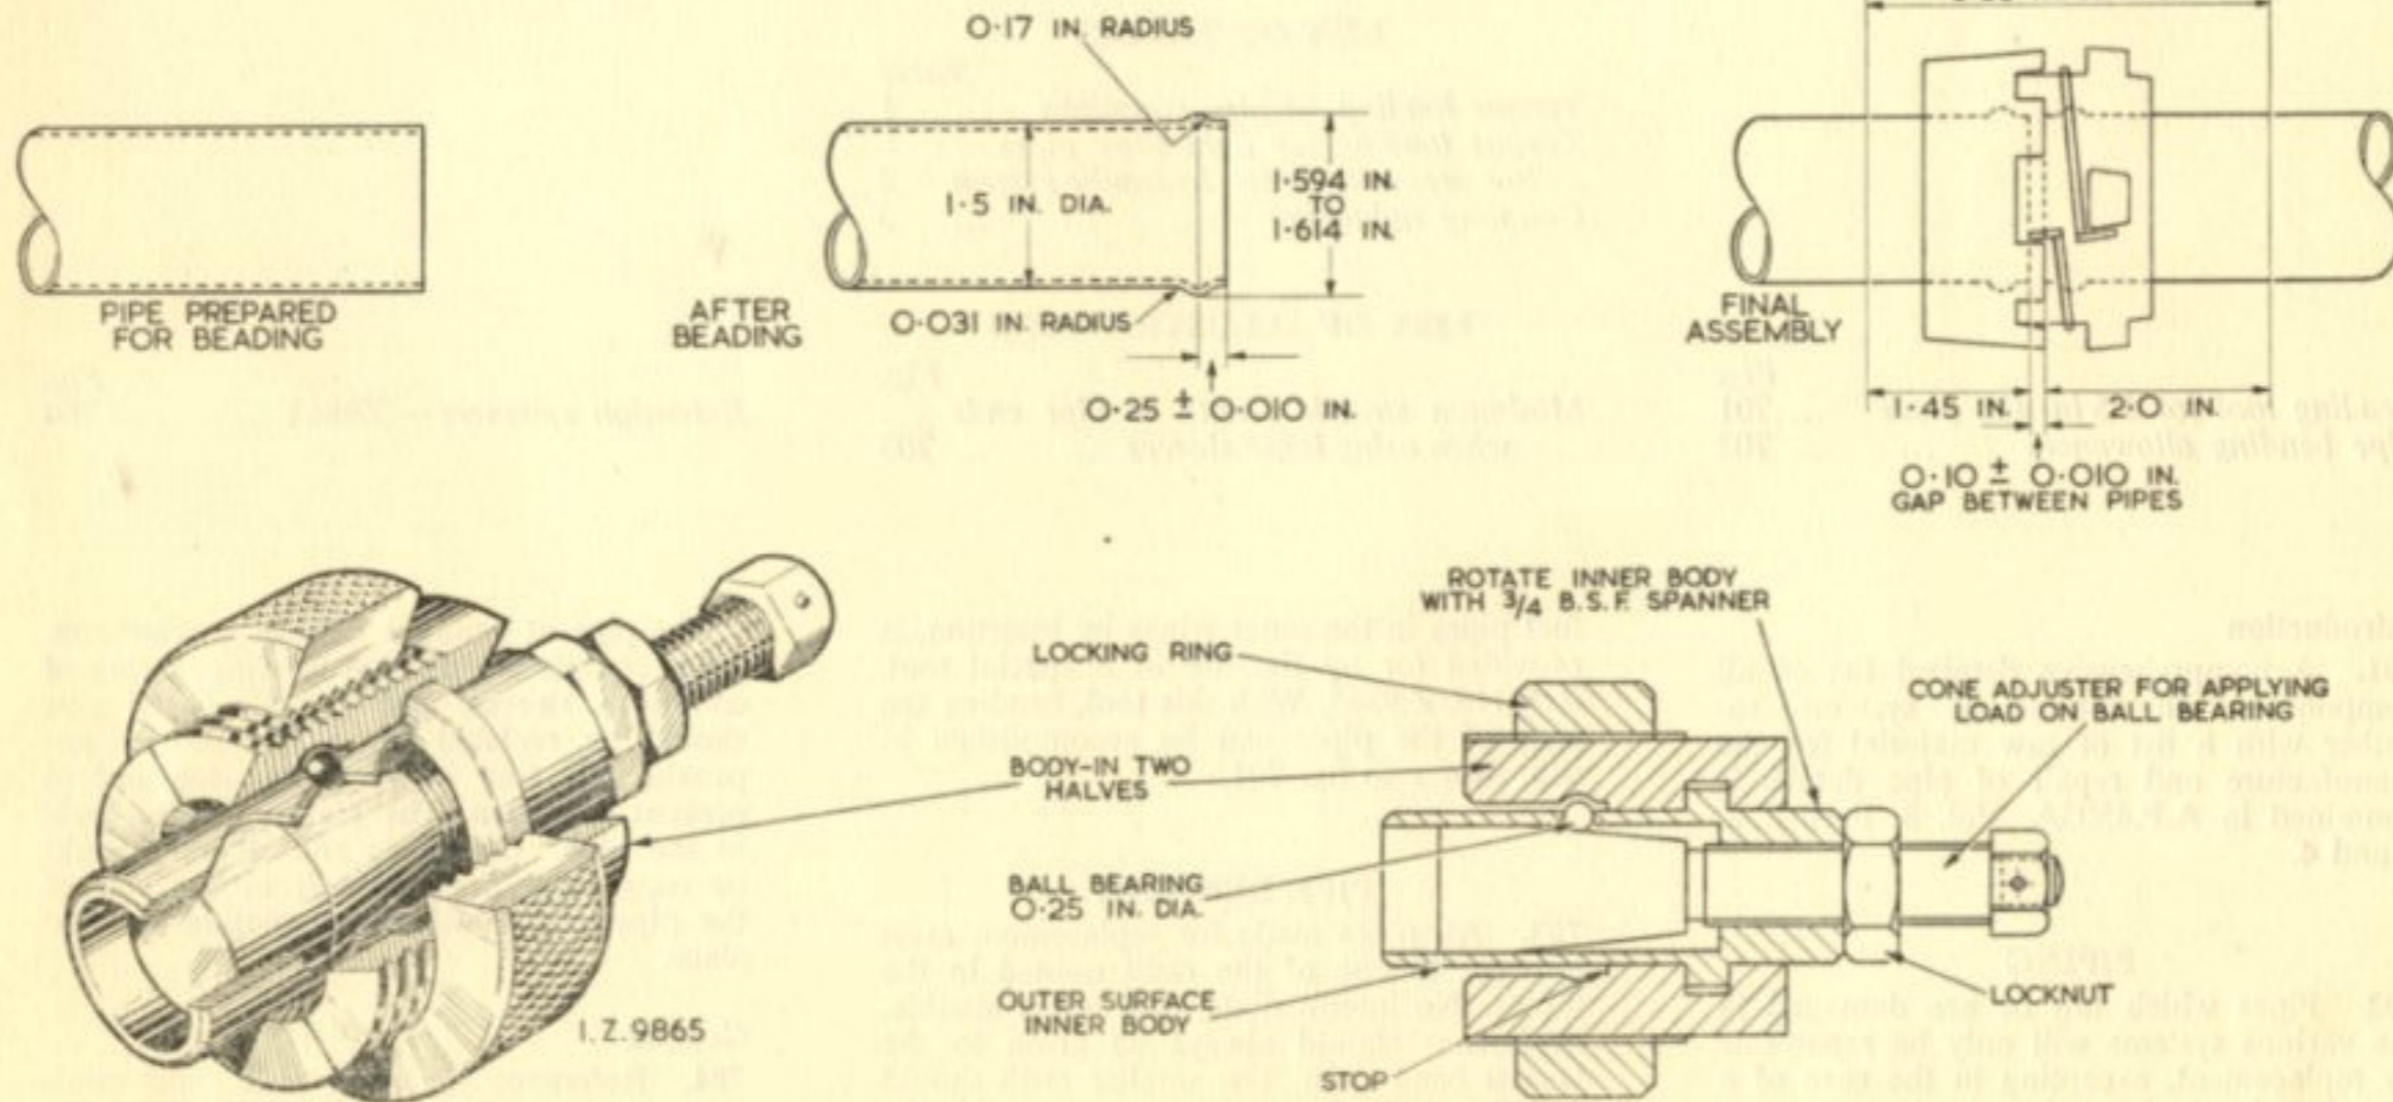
Beading tool for 1.5 in. dia. pipes (using F.R.S.110/K type couplings)
